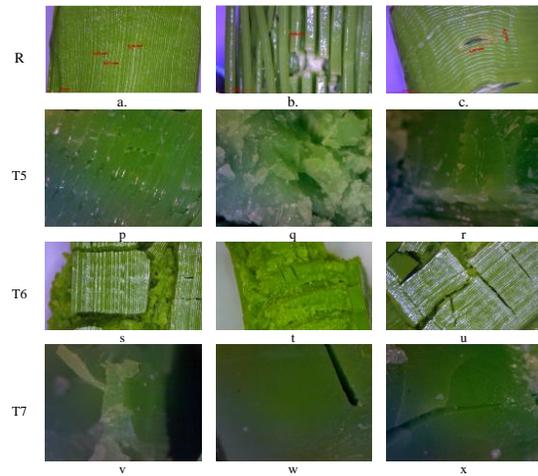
The appearance of the fracture surfaces for the thermally processed samples (6h time)
